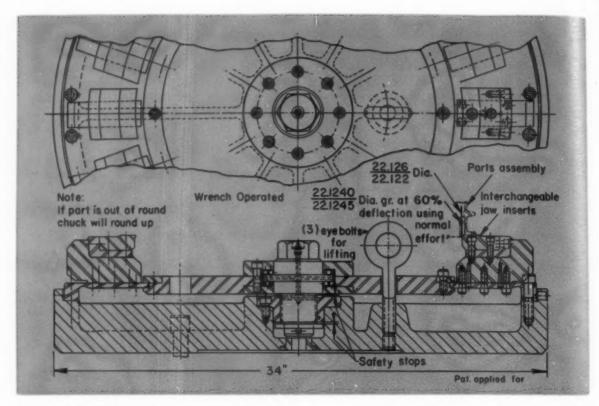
Wrench operated inspection chuck holds workpiece in assembly condition for inspection. Assembly configuration is shown at upper right of front section.
